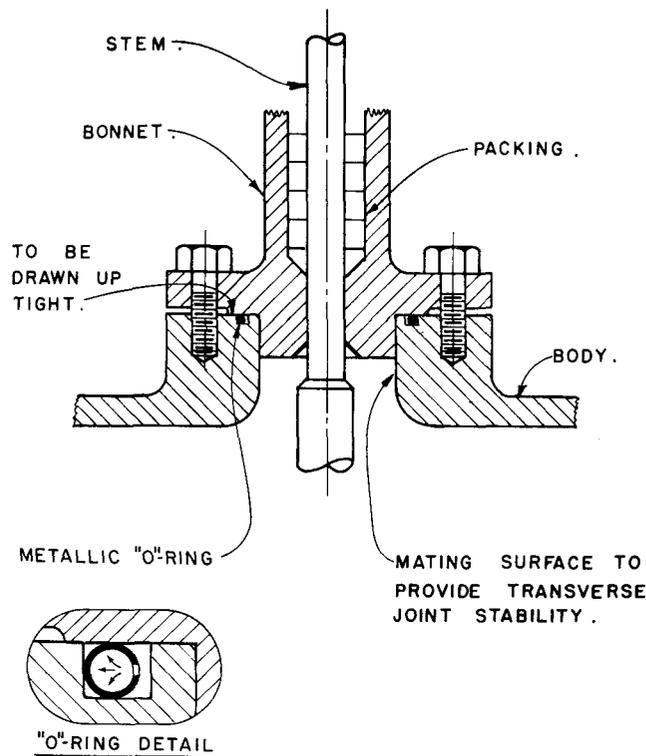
Flanged Bonnet-to-Body Joint With Metallic O-Ring Seal.
